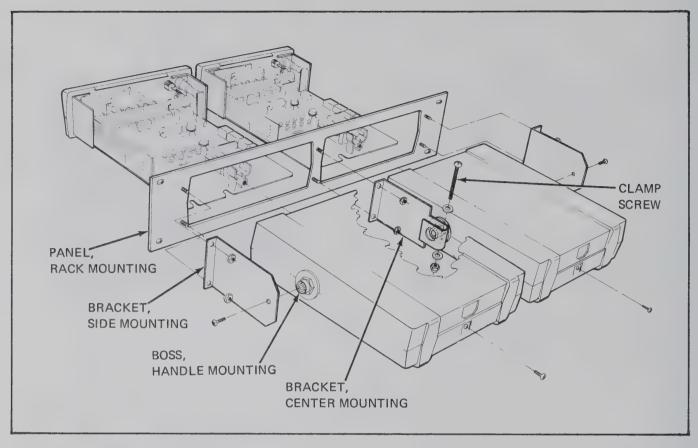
RACK MOUNTING KIT, SIDE-BY-SIDE MOUNTING
